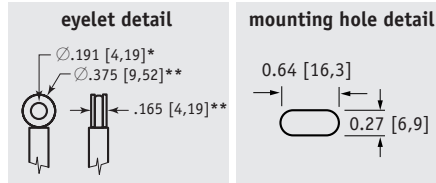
Outline Drawing (36 oz. cable tension only)
